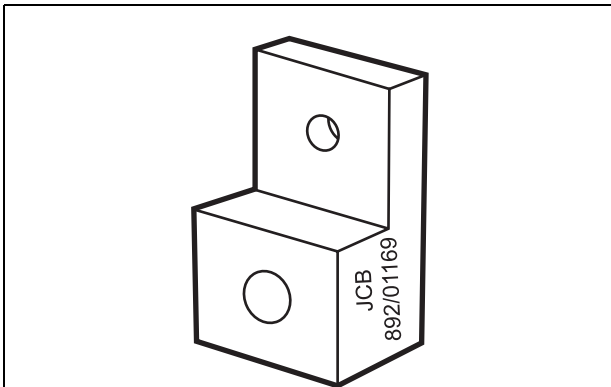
892/01169 Top Dead Centre (TDC) Setting Tool
